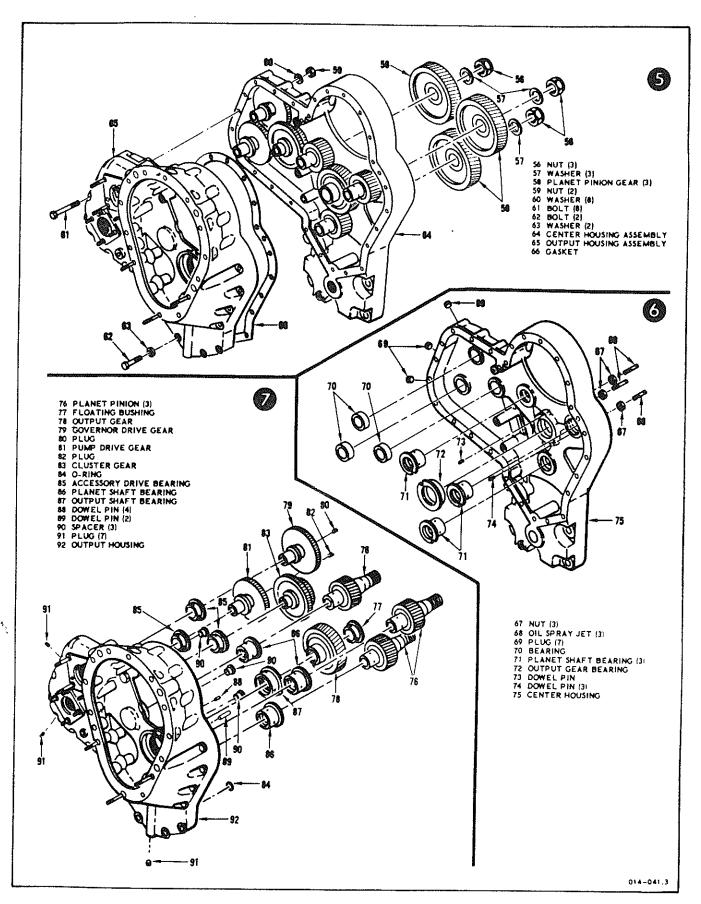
Reduction Unit, Exploded View (Sheet 3 of 3)
